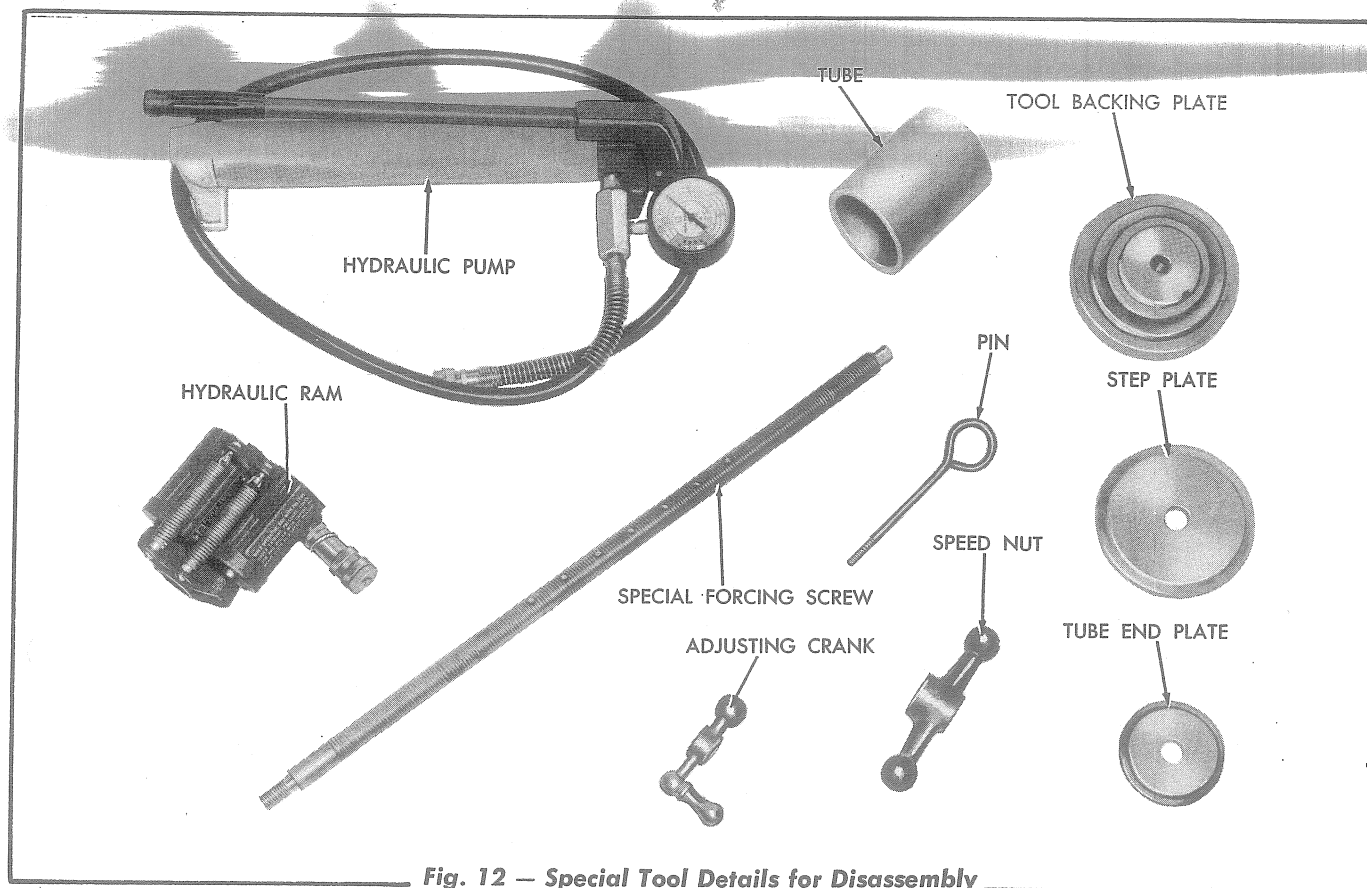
Special Tool Details for Disassembly and Assembly of Steering Clutch
